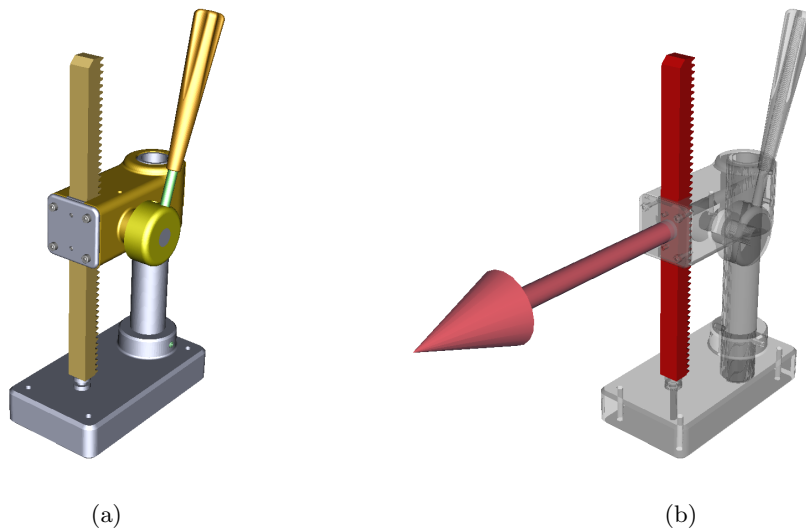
(a) The complete Press assembly. (b) Display of a disassembly problem with a required partition  $P_6$  (red) and a designated removal action for singular translation indicated by the arrow.
